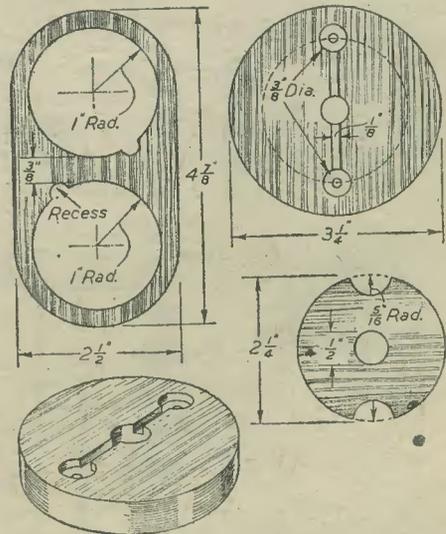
Size and shape of 'phone frame, with details of base pieces.
